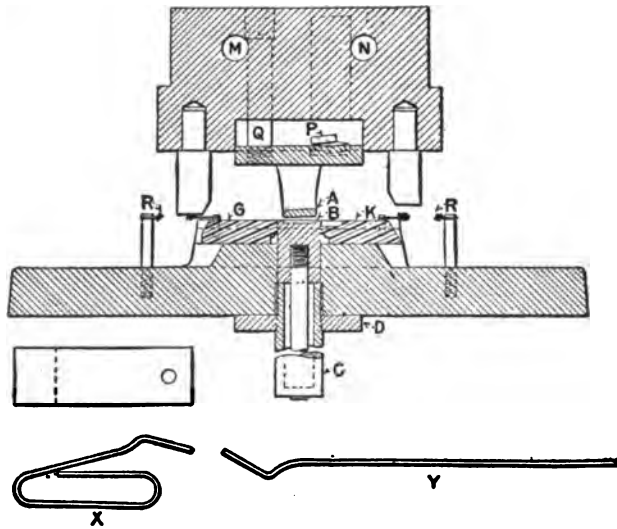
CROSS SECTION OF SPRING FORMING DIE
